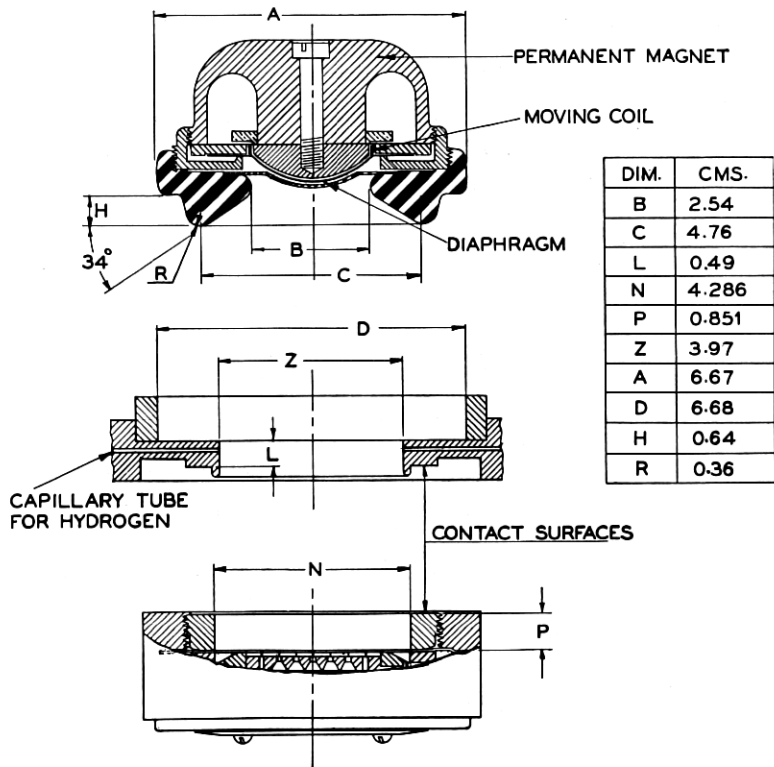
Schematic of moving coil receiver, coupler and condenser transmitter.
